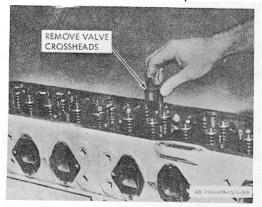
Valve crossheads removal. (b) Check guide for straightness. It should be at right angles with milled surface of head. Replace if not straight or if worn beyond replacement limit.
